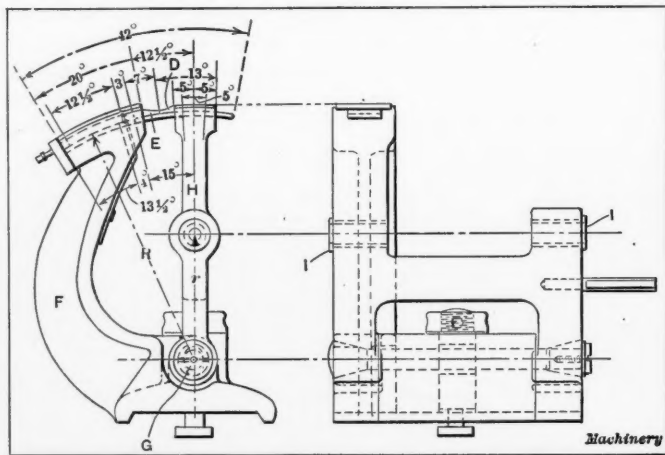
Construction of the Caliper Rest shown in Figs. 43 and 44
